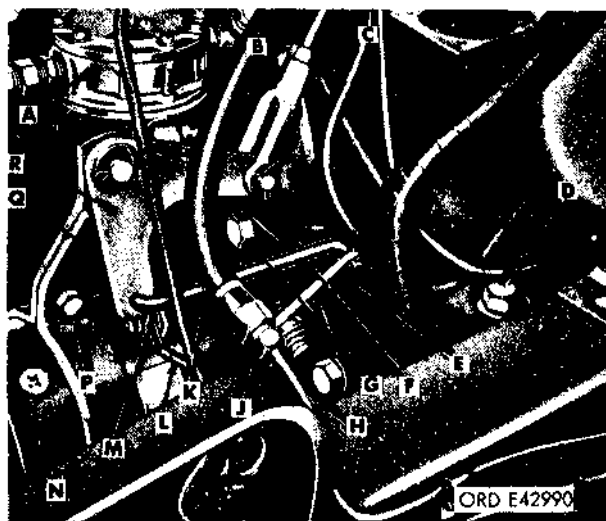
Starter and fuel pump installed on rear left side of engine.
